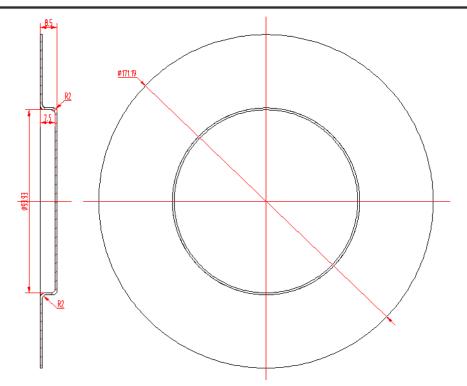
Part drawing after blanking and drawing for the first time in the first process
